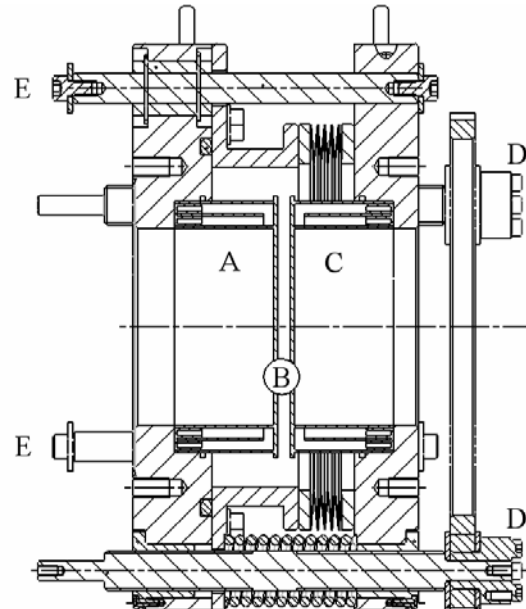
Schematic arrangement of the double disk window housing with the integrated basic window disk unit: A is Torus vacuum; B is Interspace vacuum; C is atmospheric pressure side; D is 2 (of 3) shafts for gap adjustments; E is 2 (of 3) guiding shafts.
